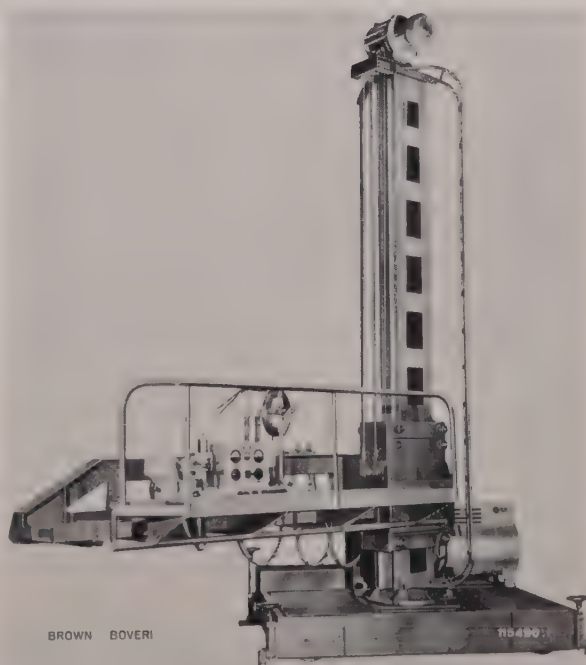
General view of a workshop welding containers of all sizes
